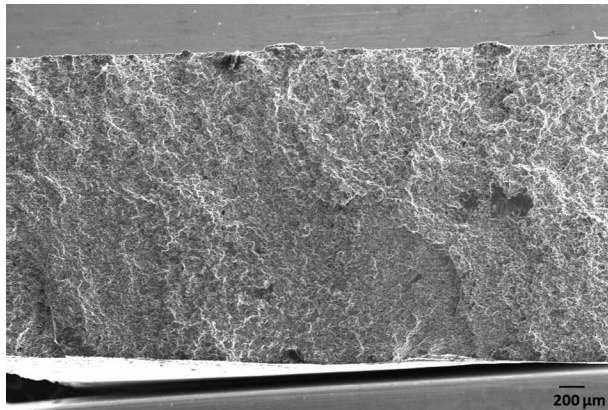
Fracture surface of a tensile-tested dissimilar weld joint of AA 2219-AA 5083 TIG welded. The specimen was tested at 20 K and failed at AA 2219 side weld interface
